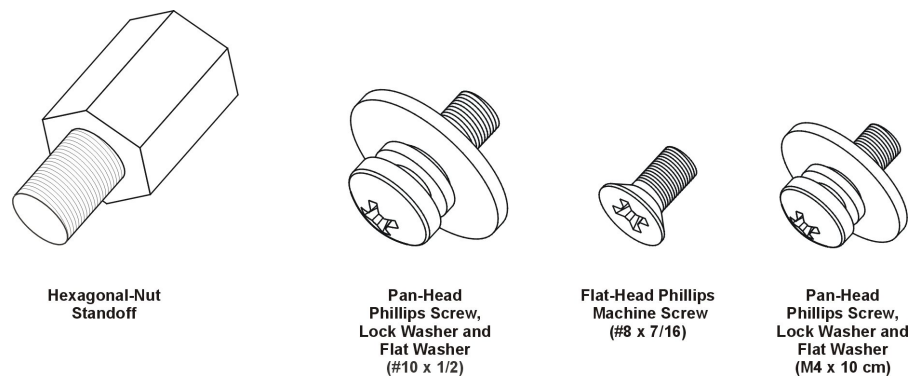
Hexagonal-Nut Standoff and Mounting Screws
